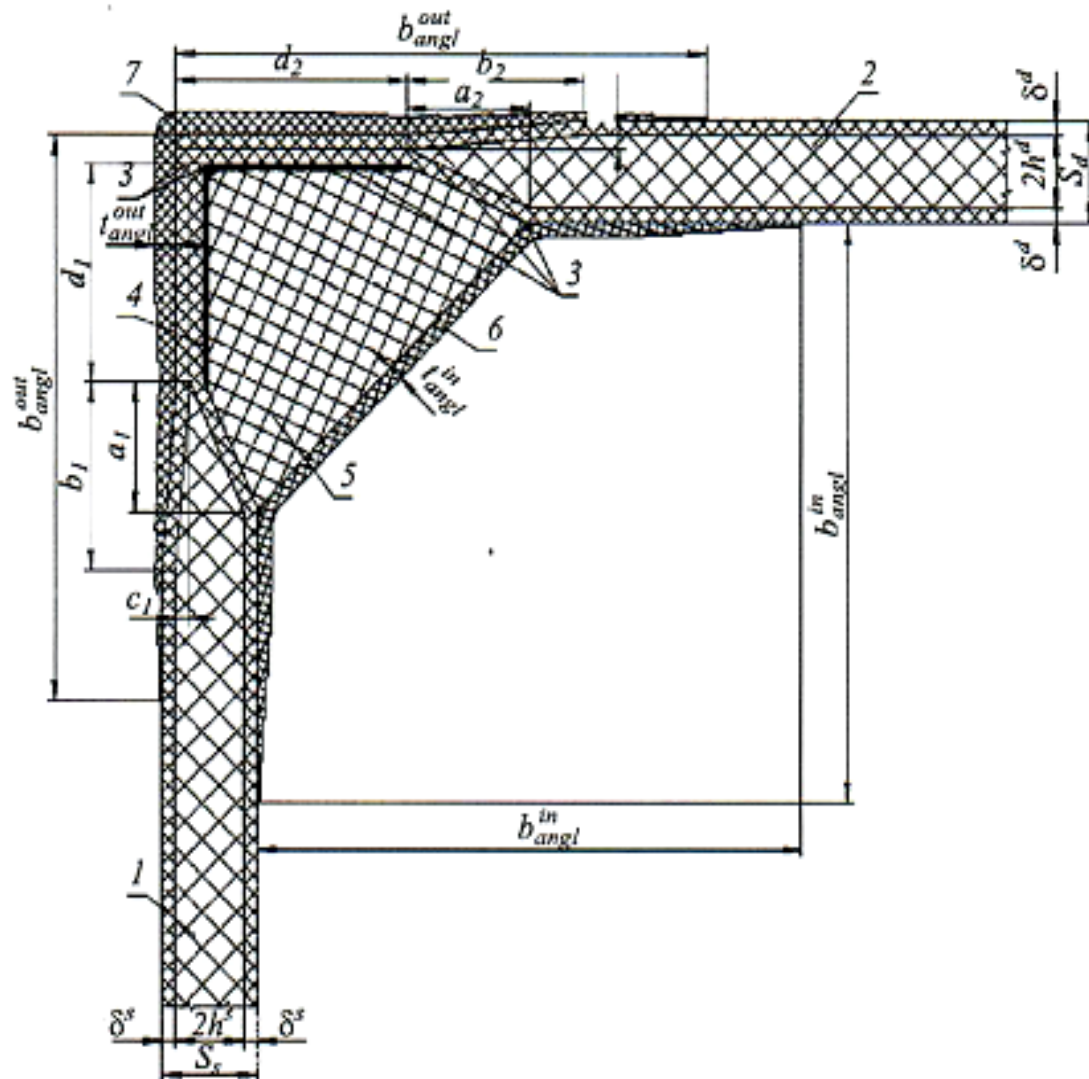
Joint of the upper deck plating and side plating of sandwich construction (Type B):
